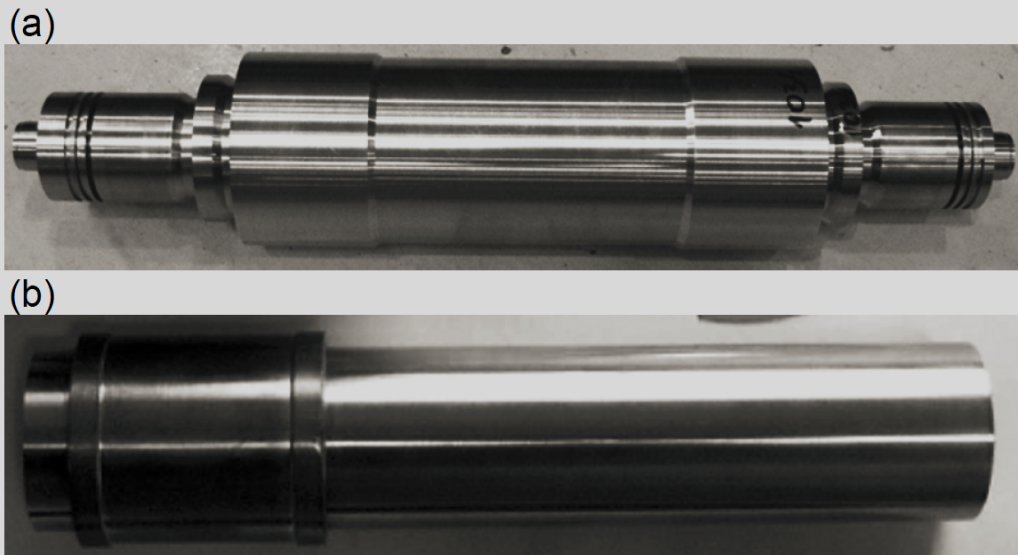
Solid rotors with explosive welded copper sleeves for: (a) 300 kW, 63 krpm IM; (b) 3.5 kW, 120 krpm IM. Photo courtesy of *Sundyne Corporation*, Espoo, Finland.
